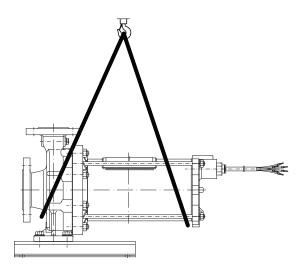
Fastening the lifting gear to the pump unit with base plate
